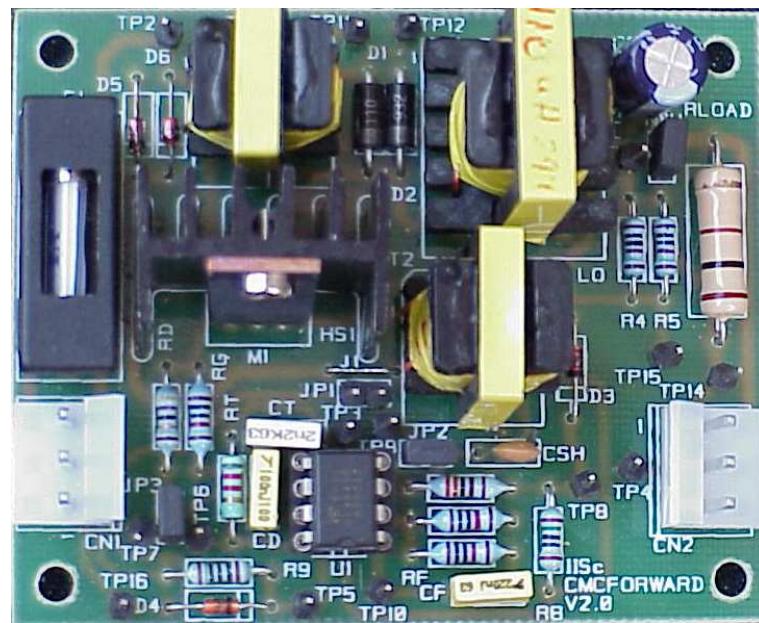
Mounted PCB Board of CMC-Forward Converter
